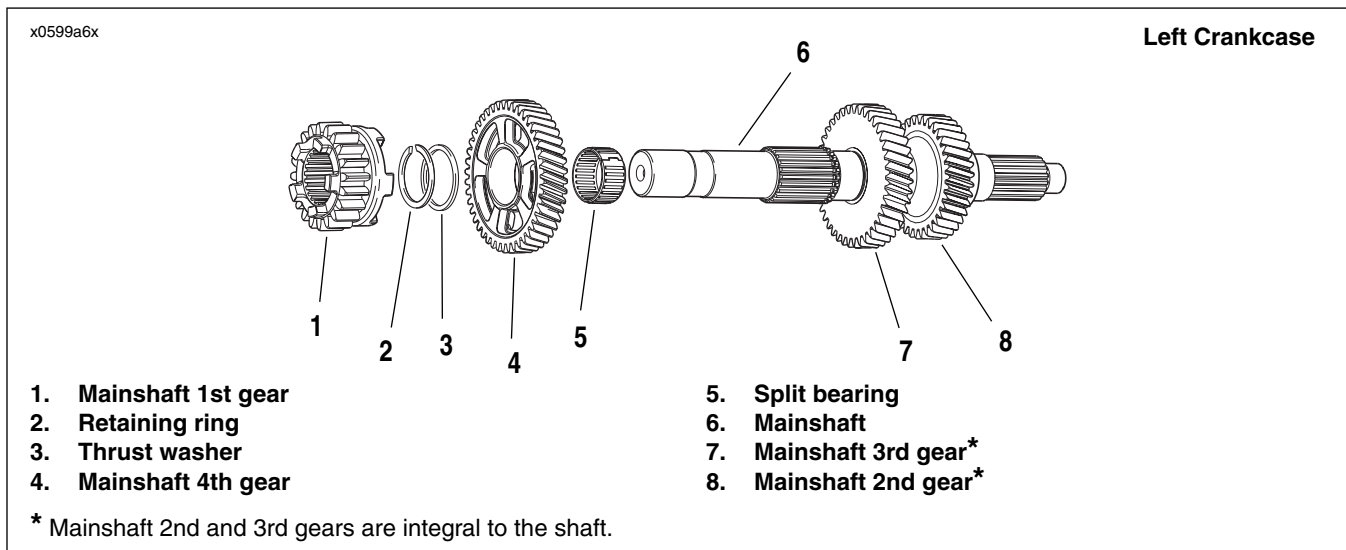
Transmission Mainshaft Assembly Once Removed from Left Crankcase/Disassembly
